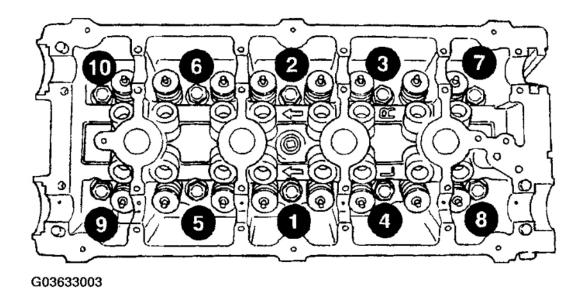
Tightening Sequence Cylinder Head Courtesy of DAIMLERCHRYSLER CORP.
